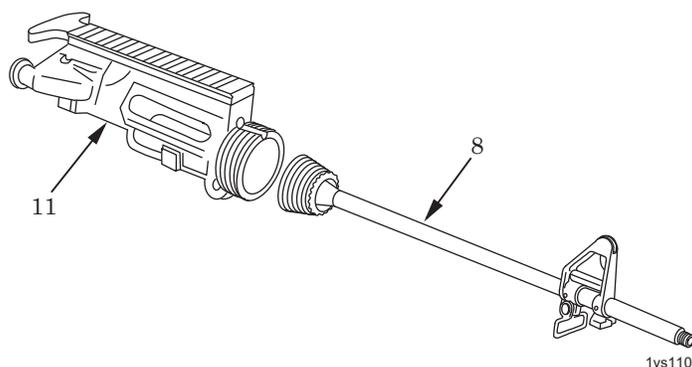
Separation of Upper Receiver Assembly and Barrel Assembly.
